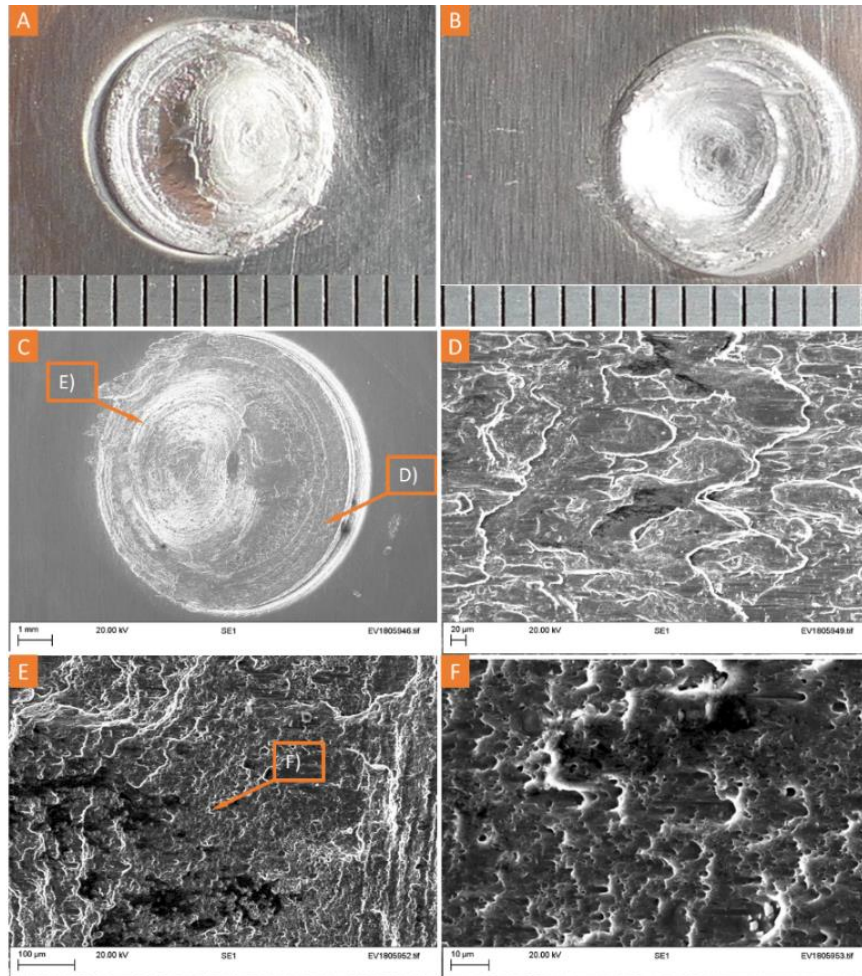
Fracture surfaces of condition W12 (RS = 1000 rev/min; PD = 2.2 mm):
